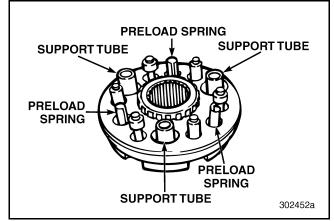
Remove Synchronizer Support Tubes and Preload Springs
